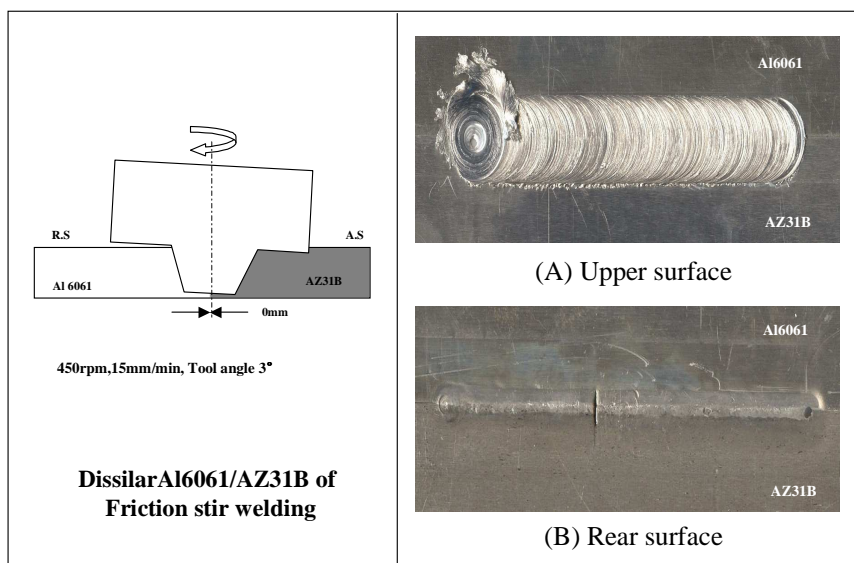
Appearance of dissimilar Al6061/AZ31B alloy FSWelded
